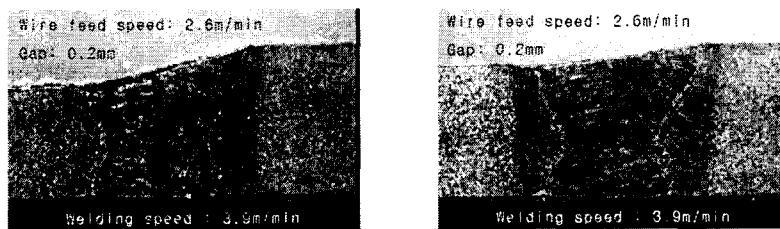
Butt weld cross section with filler wire for 0.2mm gap(feeding rate: 2.6m/min)
